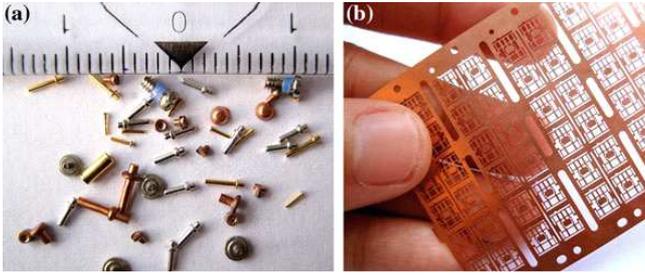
Micro parts used in industry [4]: a) Massive forming of microscopic parts b) Stamping tiny parts from sheet metal billet.
